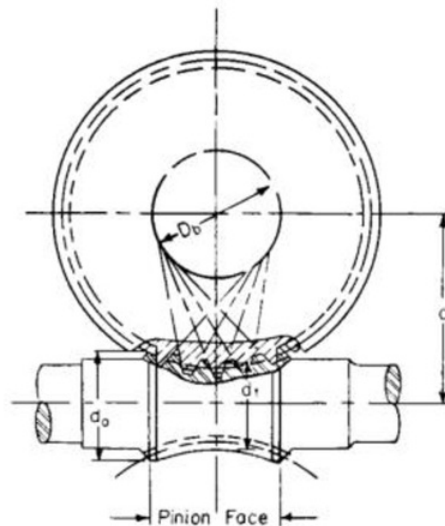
A drawing clarify the centroid of worm gearing system [71].
